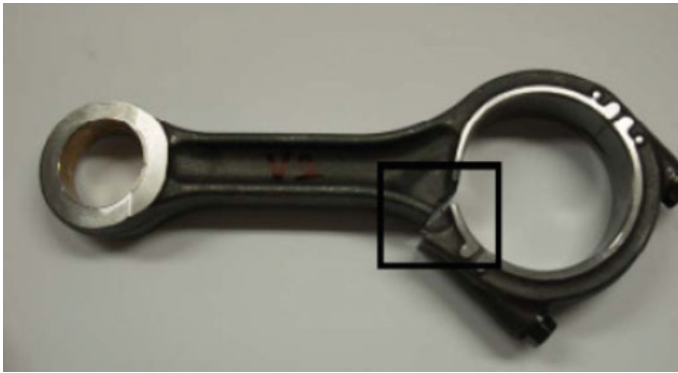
Additional notches on the big end, on the top and bottom surface
